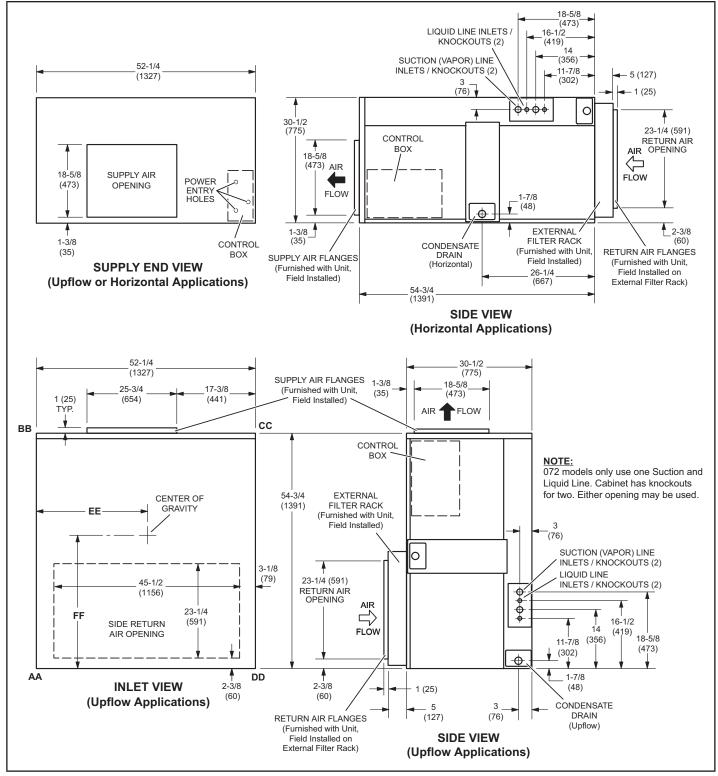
EL072-090XA and ELA 072-090 Unit Dimensions - inches (mm)
